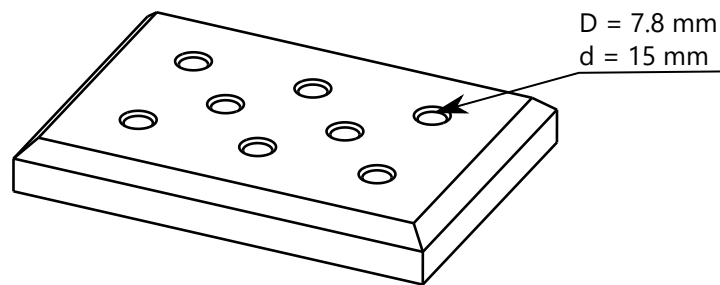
Castingform with 15 mm depth to define the 7.8 mm diameter of the dielectric specimens.
